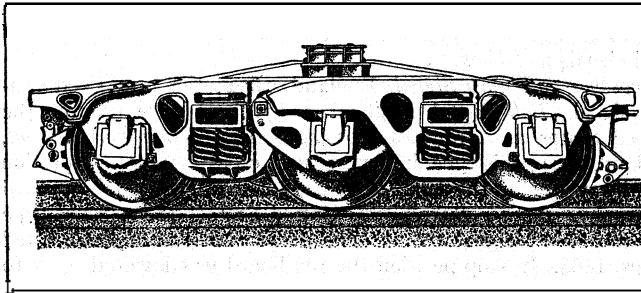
SIX-WHEEL FREIGHT CAR TRUCK
